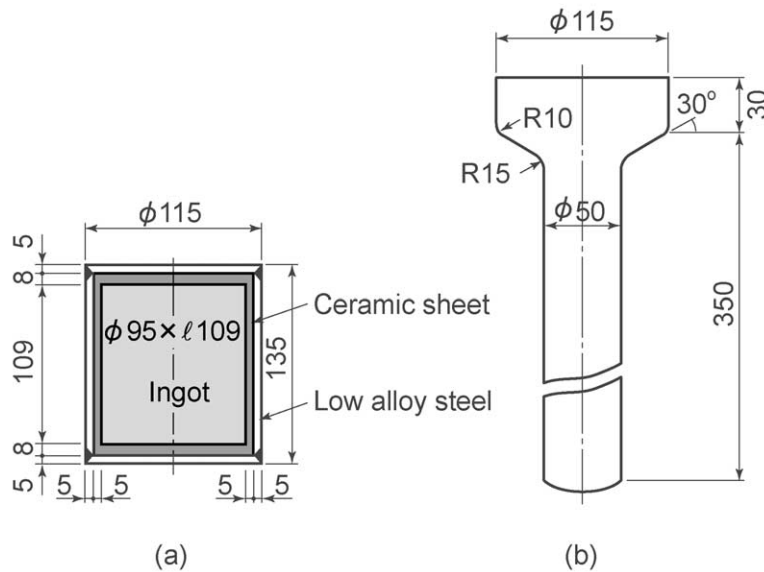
Schematic illustrations of hot-extrusion test samples, (a) before the test, (b) afterwards.
